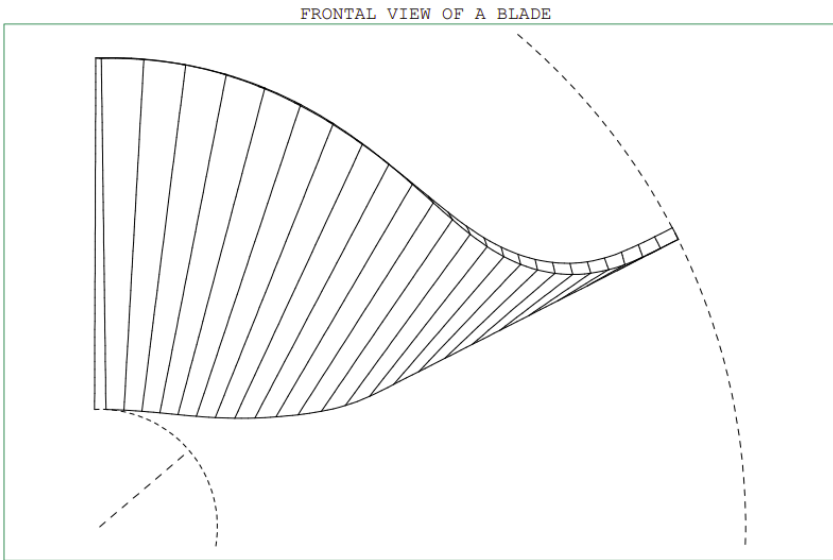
Rotor blade frontal view from the output file of GASPATH.
